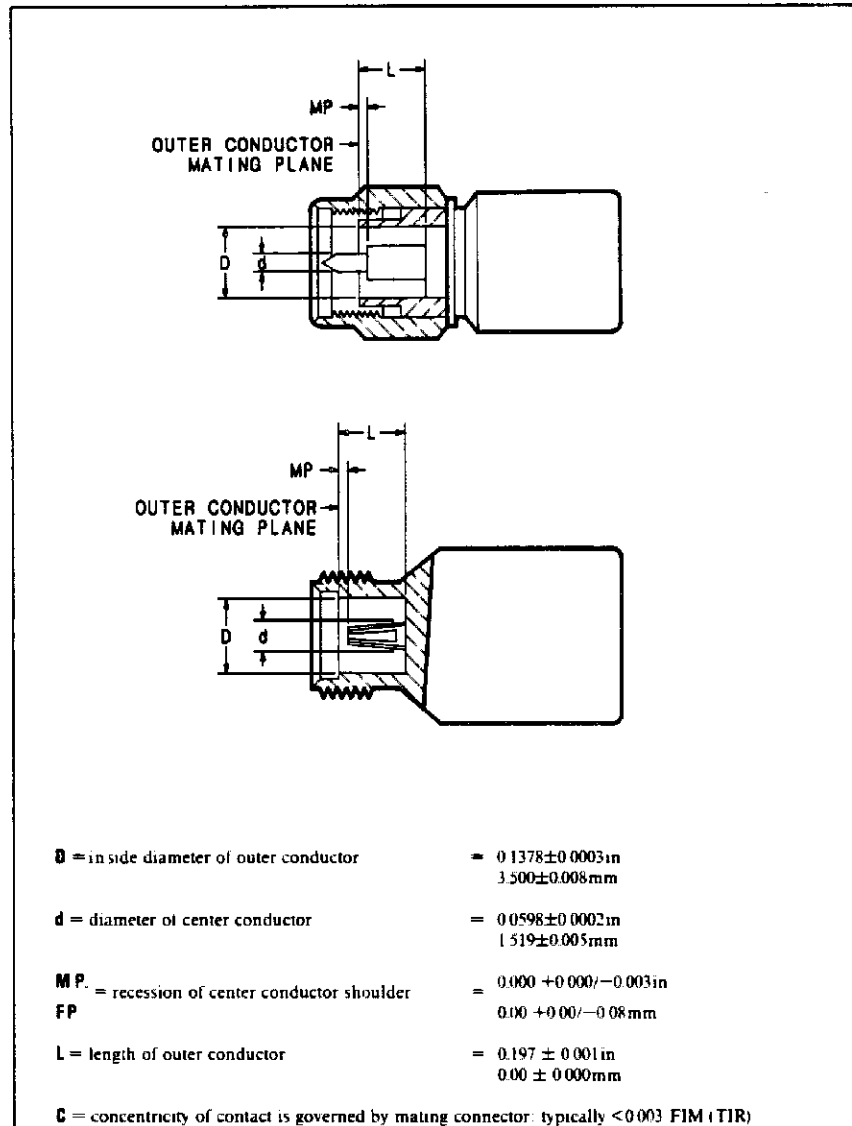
Mechanical Dimensions of the Short Circuit.
